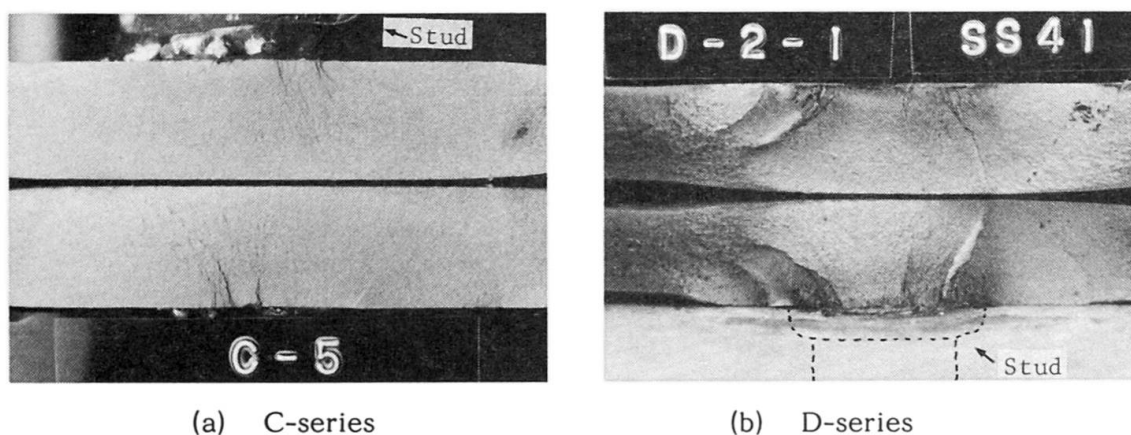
Typical fracture surface of coupon specimens.
